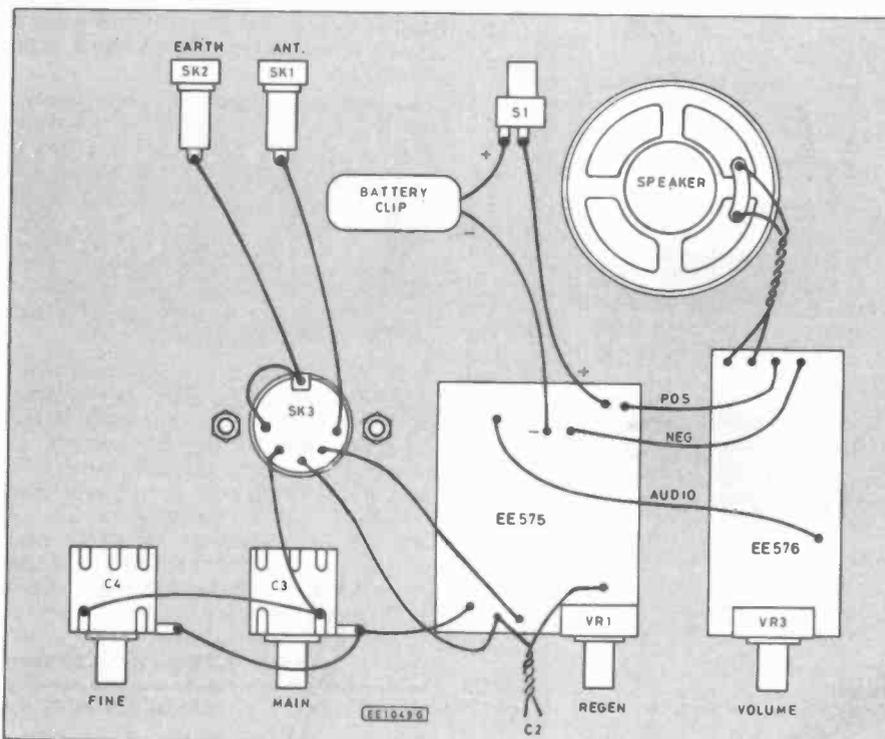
Interwiring details for the off-board components. Note pin 4 of coil L1 is "earthed" through socket SK3 chassis tag.
